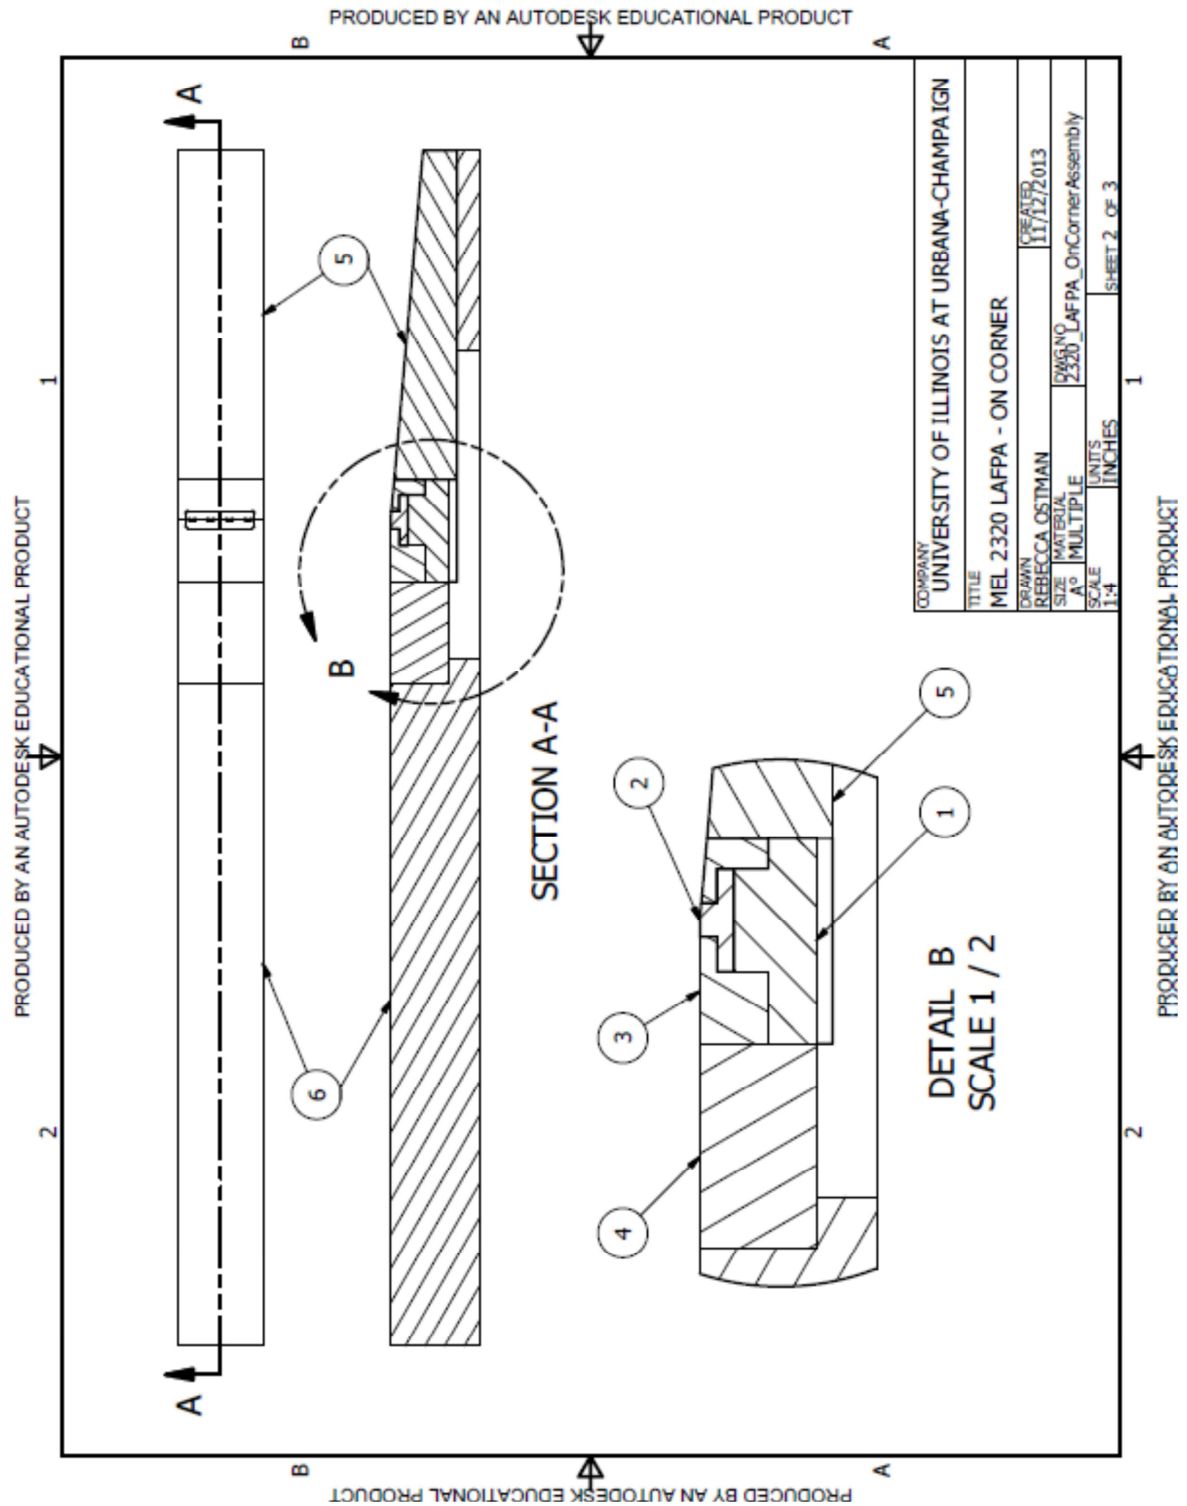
(cont.) b) cross section and detail views of the LAFPAs on ramp corner assembly,
